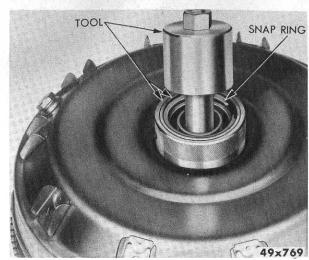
Tool and Snap Ring Positioned for Installing (Tool C-884)
